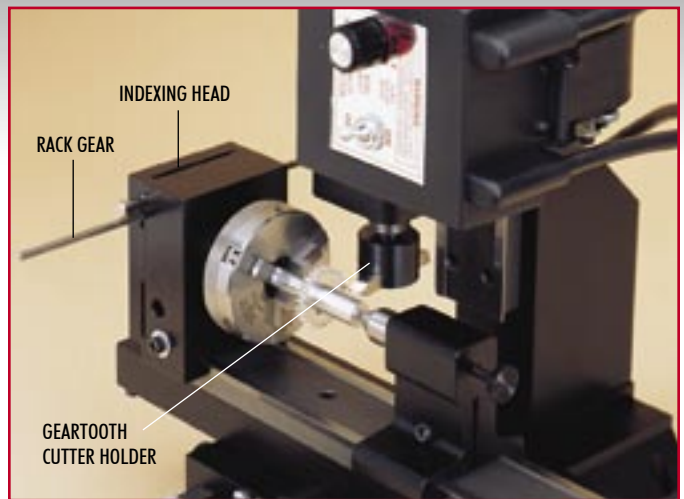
A toothed gear sprocket is being cut using the indexing attachment. The blank is being held in a 3-jaw chuck and supported at the other end by the tailstock. A P/N 3217 geartooth cutter holder (included with the indexing attachment), holds a standard 1/4" tool blank which has been custom ground to the shape required.
